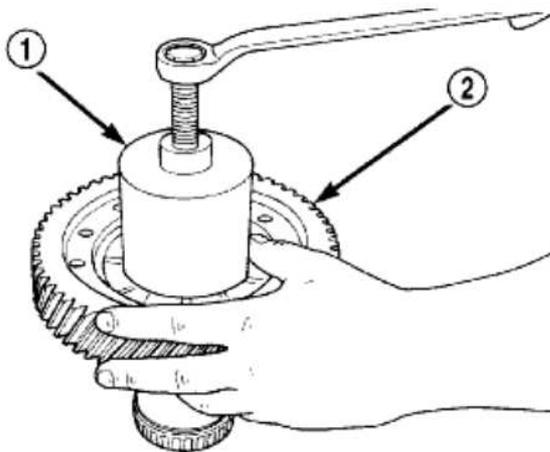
Installing Puller Set 5048, 5048-4 Collets, & L-4539-2 Button To Differential Bearing Cone On Bearing Retainer Side
